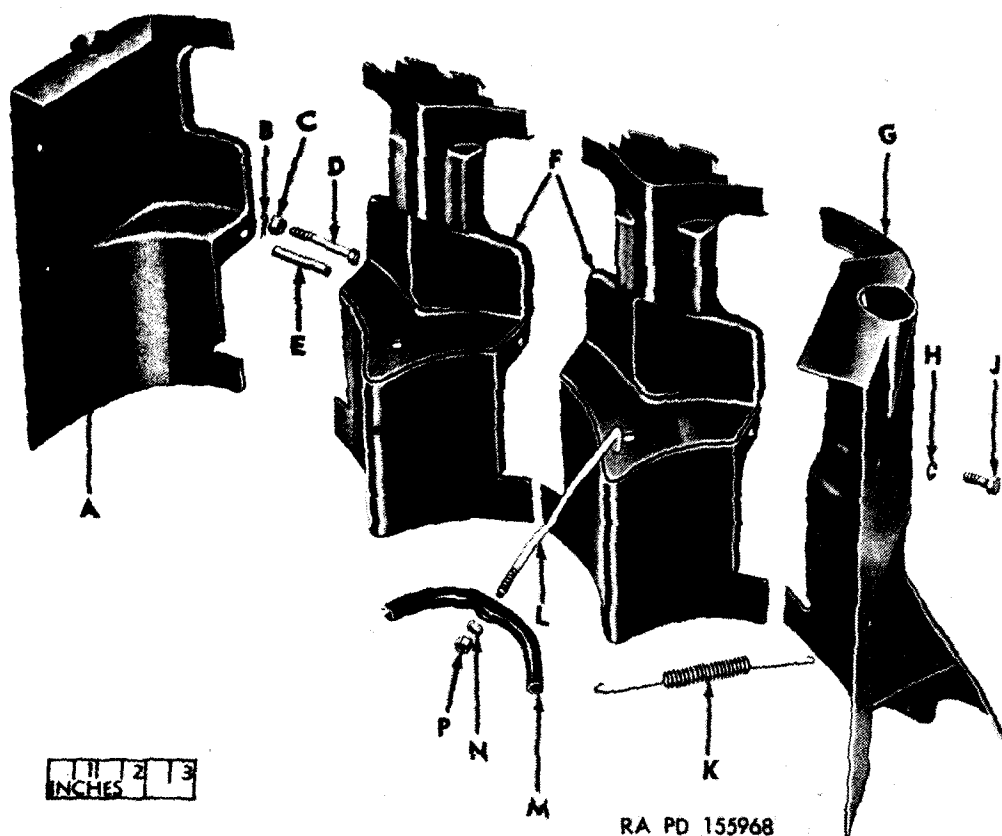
, lockwashers (N), end air deflector springs (K), air deflector hooks (L), air deflector clamps (M), and plain nuts (P). Connect the deflectors with air deflector spacers ((E), fig. 88), using drilled-hex-head bolts ((D), fig. 88), slotted nuts ((C), fig. 88), and cotter pins ((B), fig. 88).
